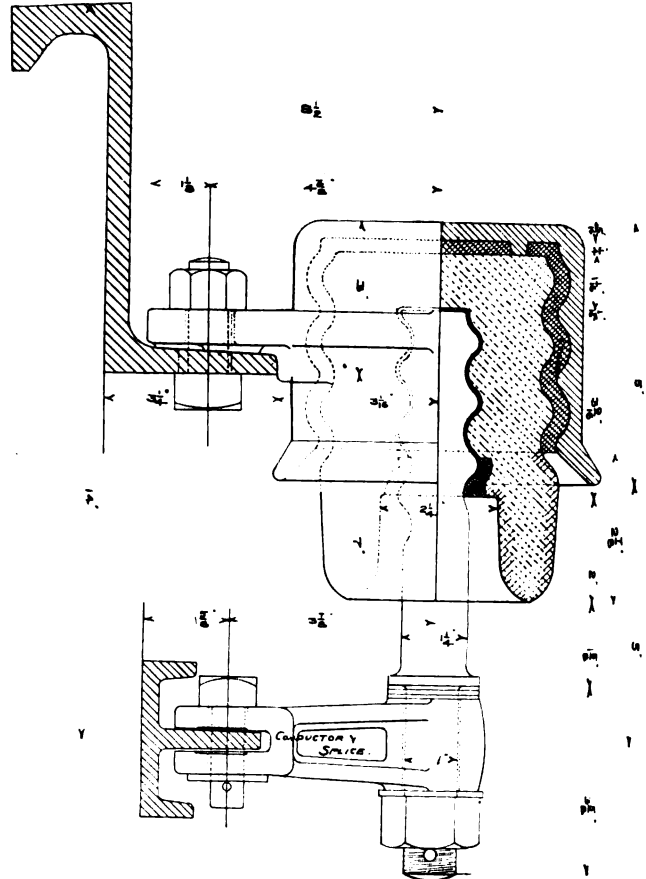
INSULATOR FOR NEW CONDUIT ROADS IN NEW YORK.
